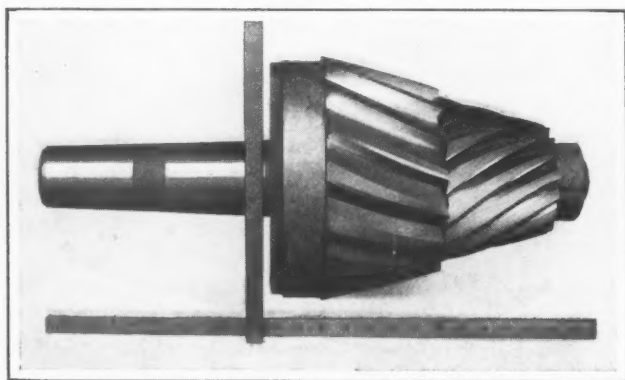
Cutter Used for Milling Two Angular Surfaces and a Narrow Shoulder Between, at One Time
